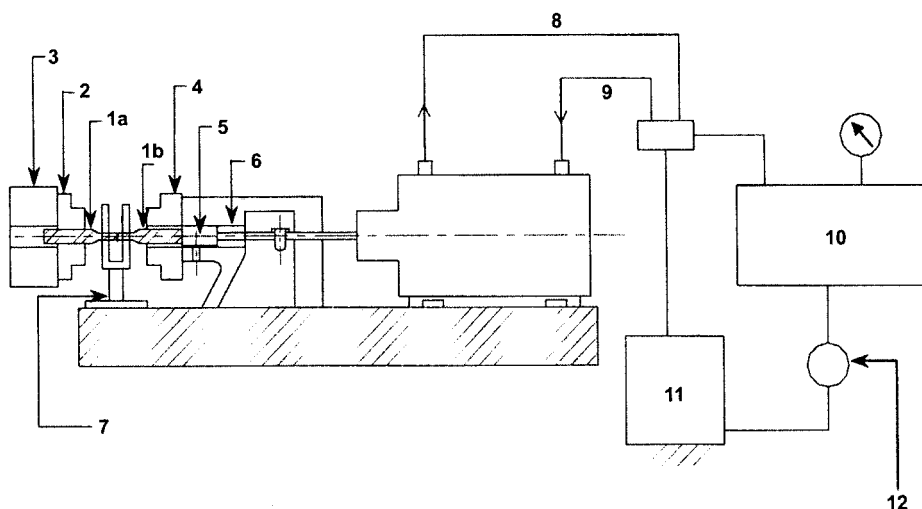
Schematic of spin-friction welding system: (1a, 1b): specimen; (2) rotational clip; (3) brake system; (4) fixed clip; (5) piston; (6) cylinder; (7) supporter; (8) oil outlet; (9) oil inlet; (10) oil pressure adjuster; (11) oil tank; (12) oil pressure pump.
